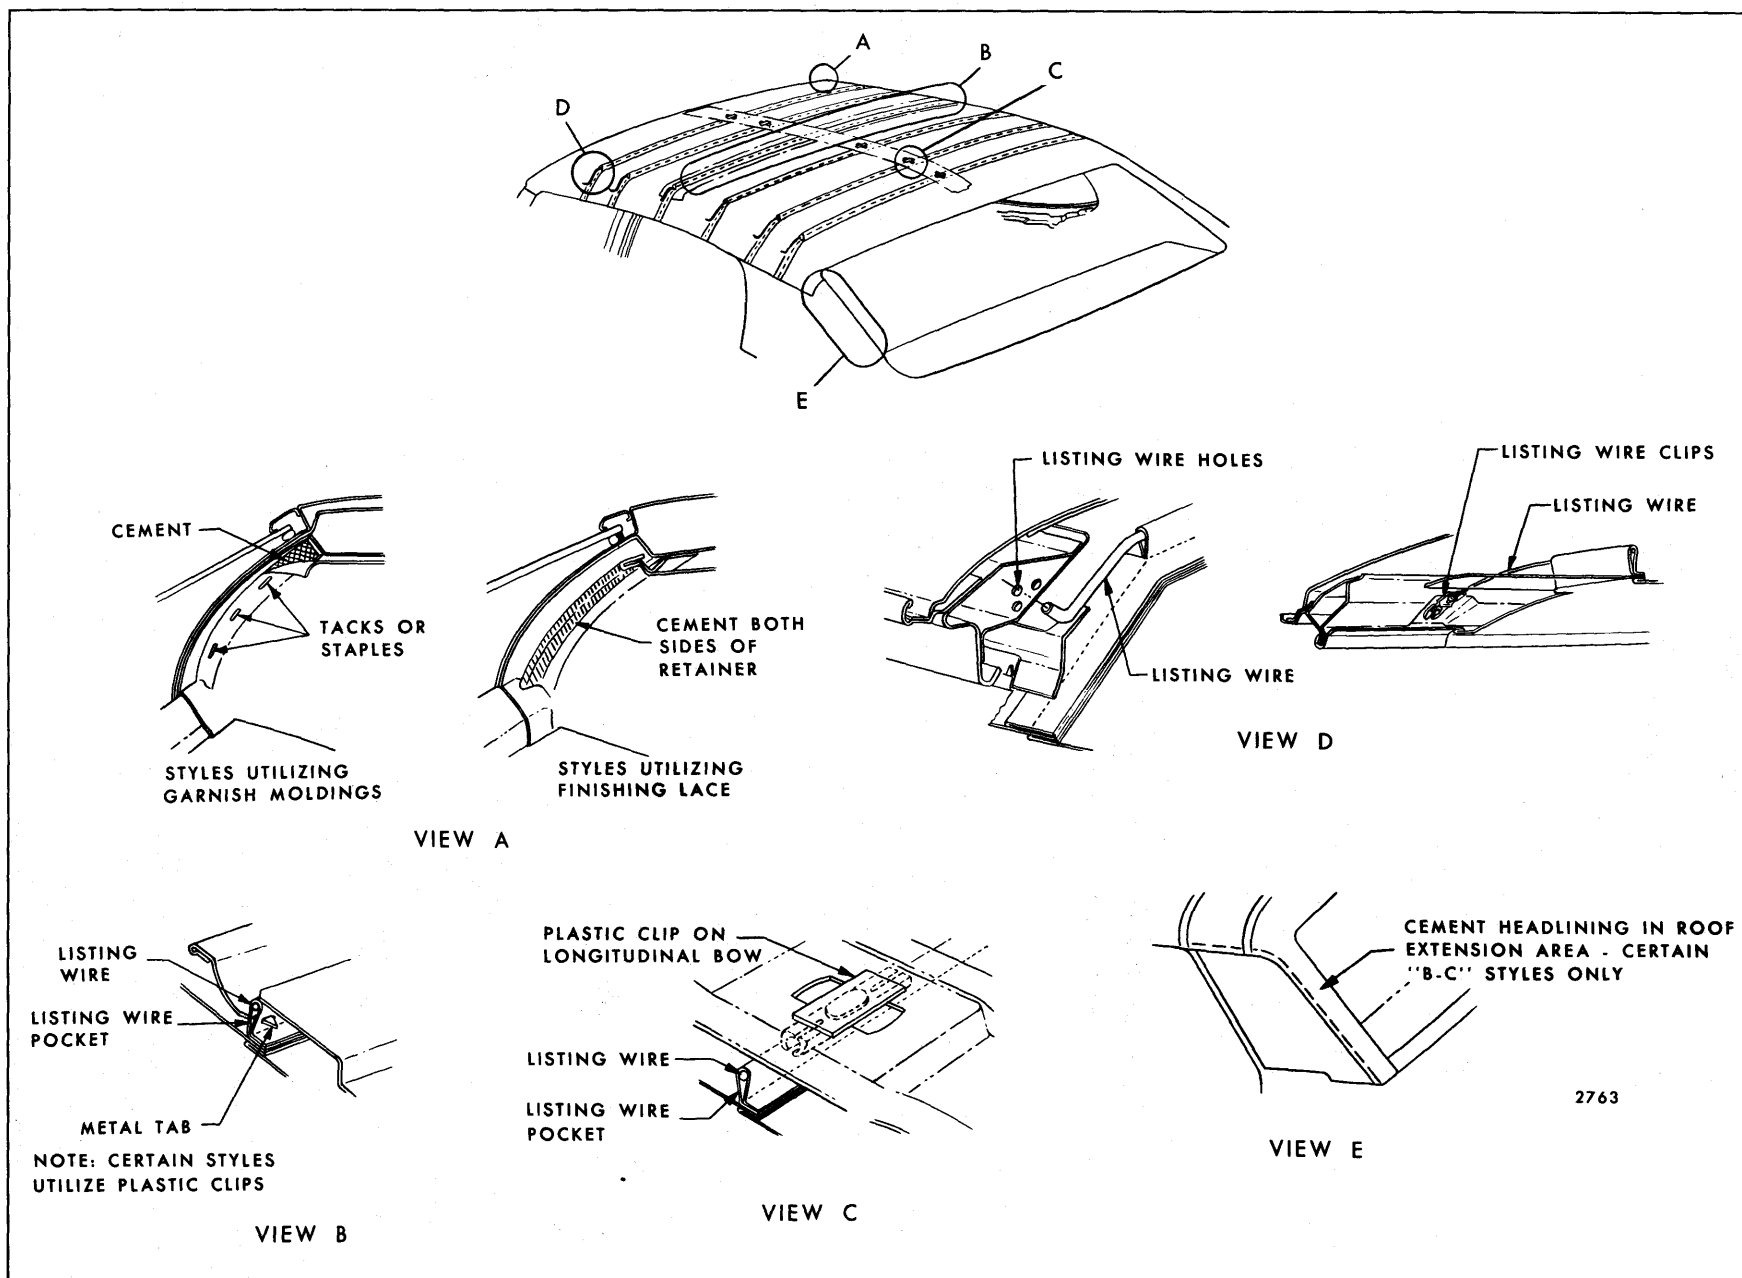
Typical Cloth and Vinyl Headlining Installations
